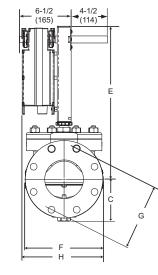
Mx40-717x with Flanged 2-Way Globe Valves
